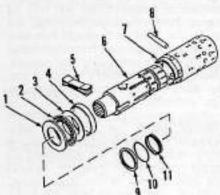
Exploded view of steering valve spool, sleeve, bearings and soals.
